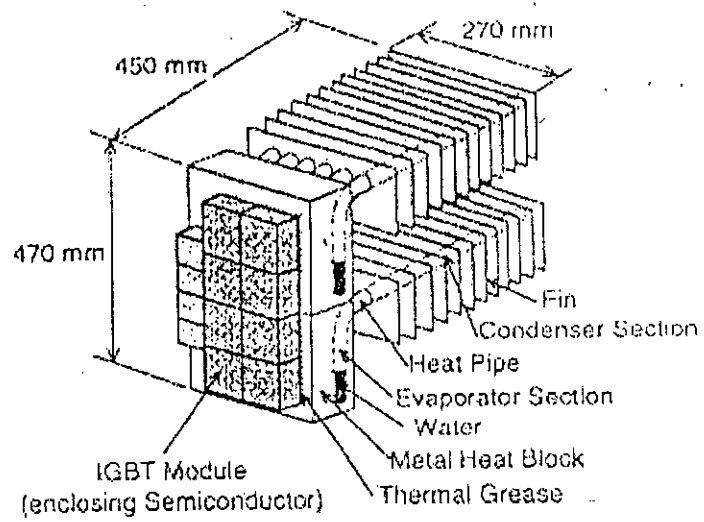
Heat Pipe Cooler of IGBT Modules [2]
